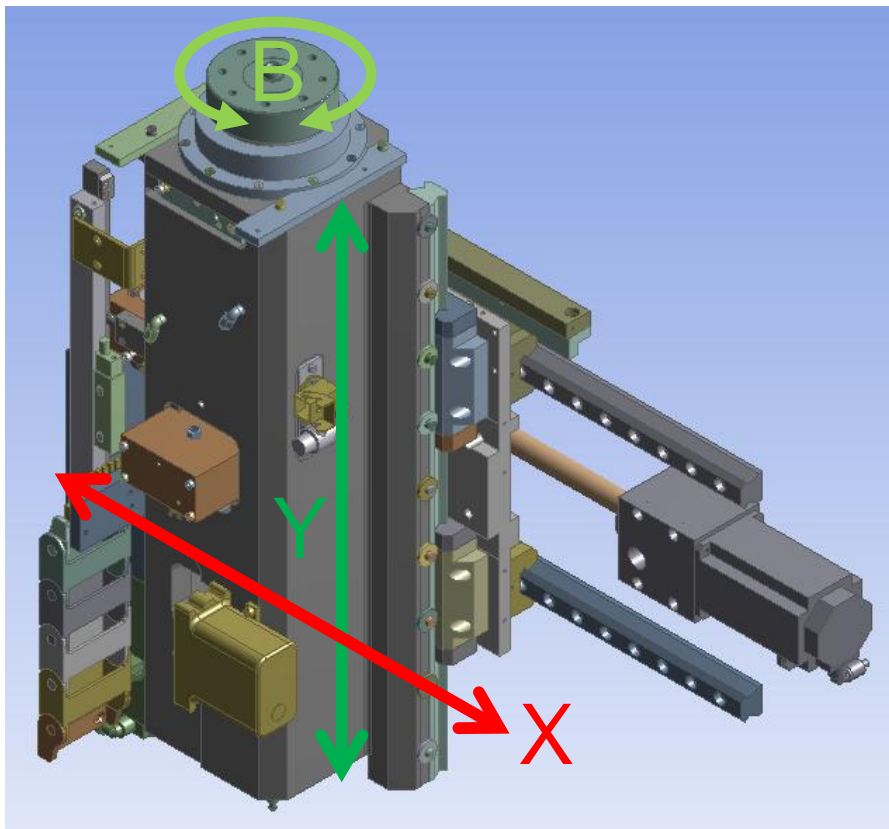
Typical geometry of a machine tool assembly without geometry processing.
